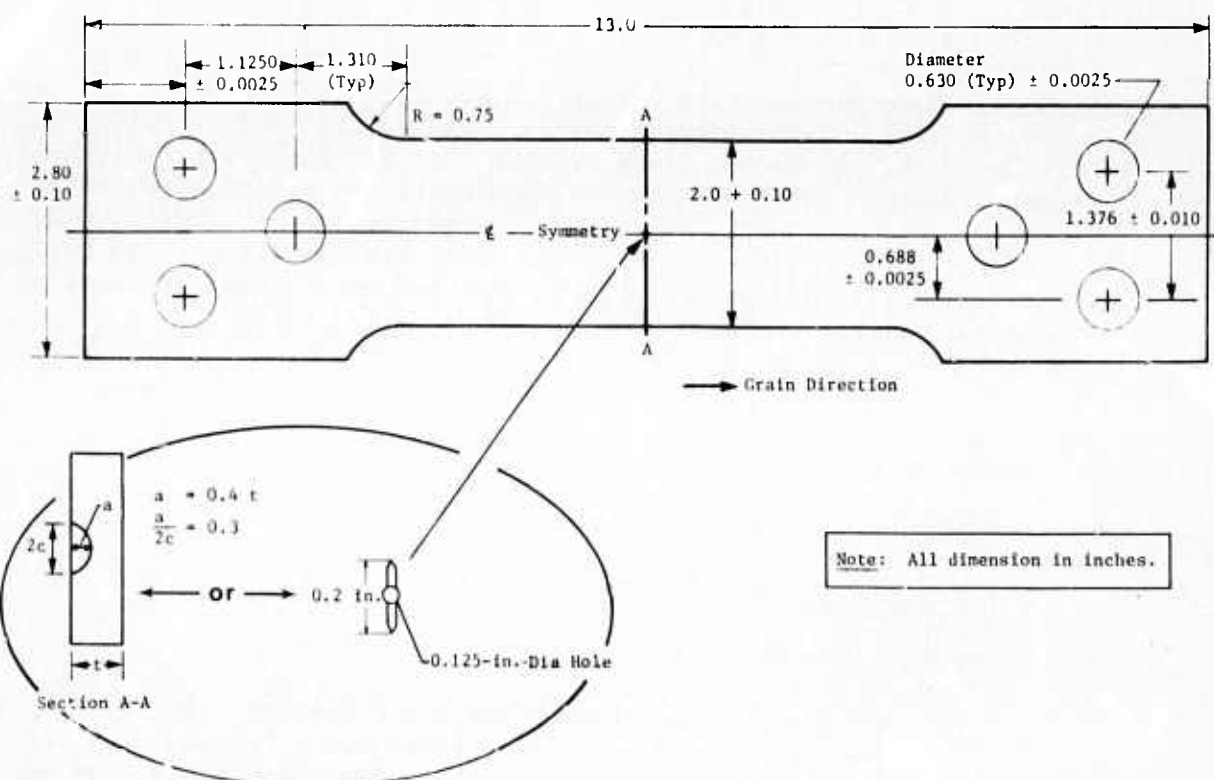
Center-Cracked and Surface-Flawed Plane Stress Specimen
